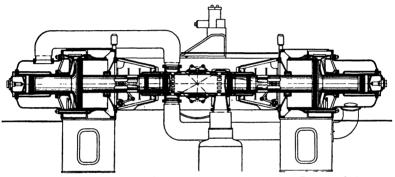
Power-gas generator (free-piston compressor) of Sulzer Brothers design comprises diesel and air piston assemblies in opposed arrangement. A crank interconnection actuates and times the fuel injection.
